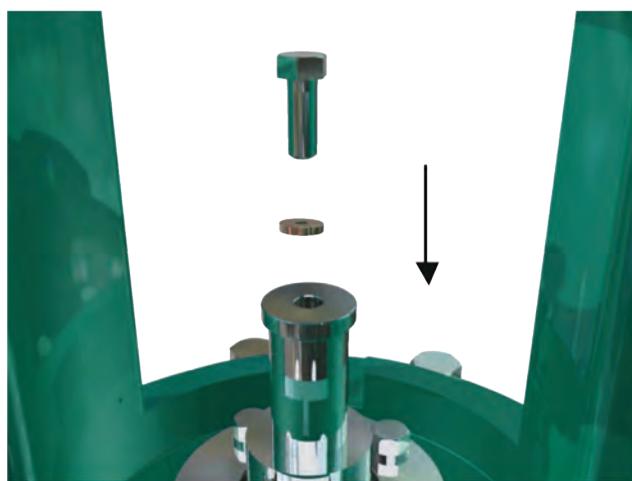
Tightening the shaft screw on the upper end of the shaft.
